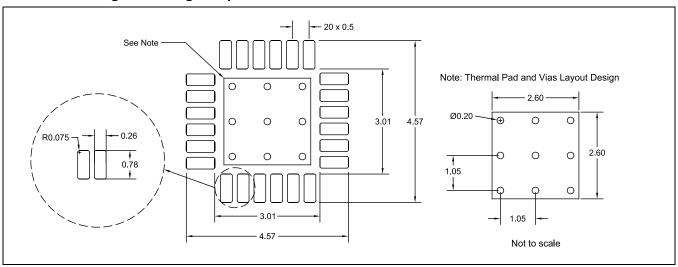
QFN 24L 4.0mm × 4.0mm soldering footprint (NOT TO SCALE)
